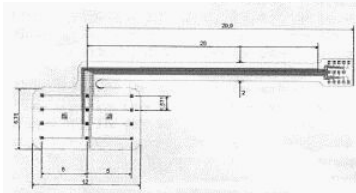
Design of a 12 channel cuff-electrode with integrated interconnects. Dimensions in mm
